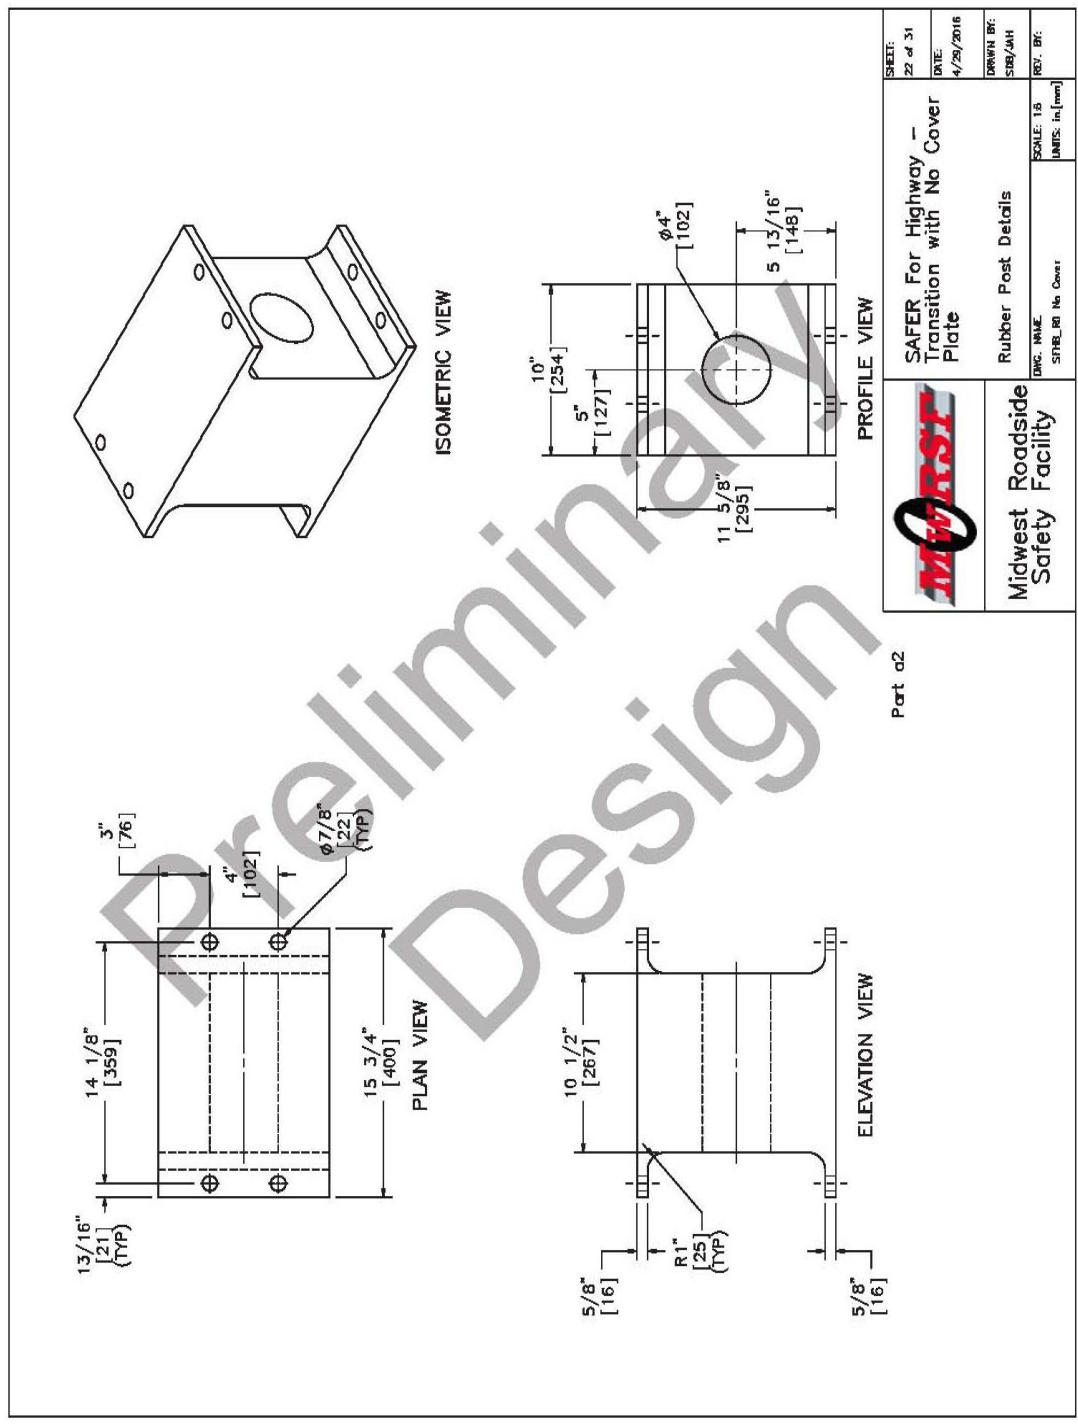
Rubber Post Details, No Cover Plate, RESTORE Barrier Transition
